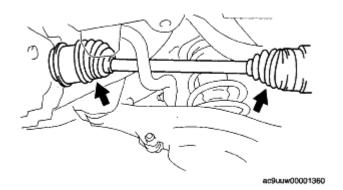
Locating Dust Boot Courtesy of MAZDA MOTORS CORP.
